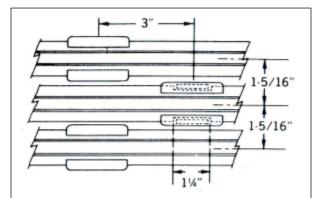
Side Contact Power Feed Locations – alternate as shown, minimum spacing (note: three side contact bars shown).
